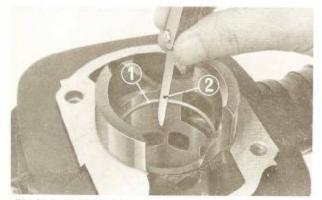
(1) Piston ring (2) Feeler gauge
